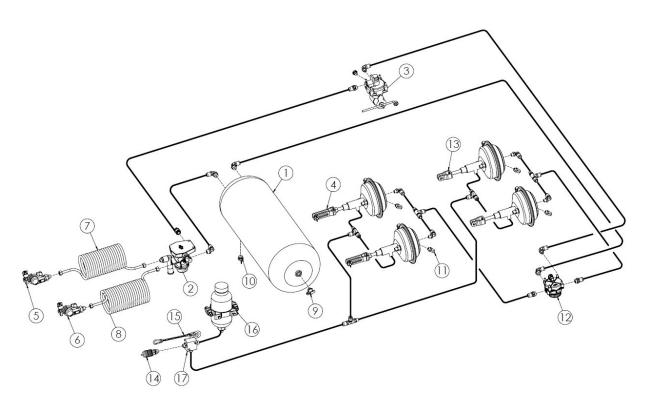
The Hydraulic pneumatic braking system with ALB (1) air tank, (2) control valve, (3) ALB valve, (4) pneumatic cylinder (long fork), (5) hose fitting (red), (6) hose fitting (yellow), (7) helical pipe (red), (8) helical pipe (yellow), (9) air-tank-control fitting, (10) drainage valve, (11) air-cylinder-control fitting, (12) relay valve (accelerator), (13) pneumatic valve (short fork), (14) hydraulic quick coupling (15) emergency valve-activation chain (16) hydraulic accumulator, (17) emergency valve.
